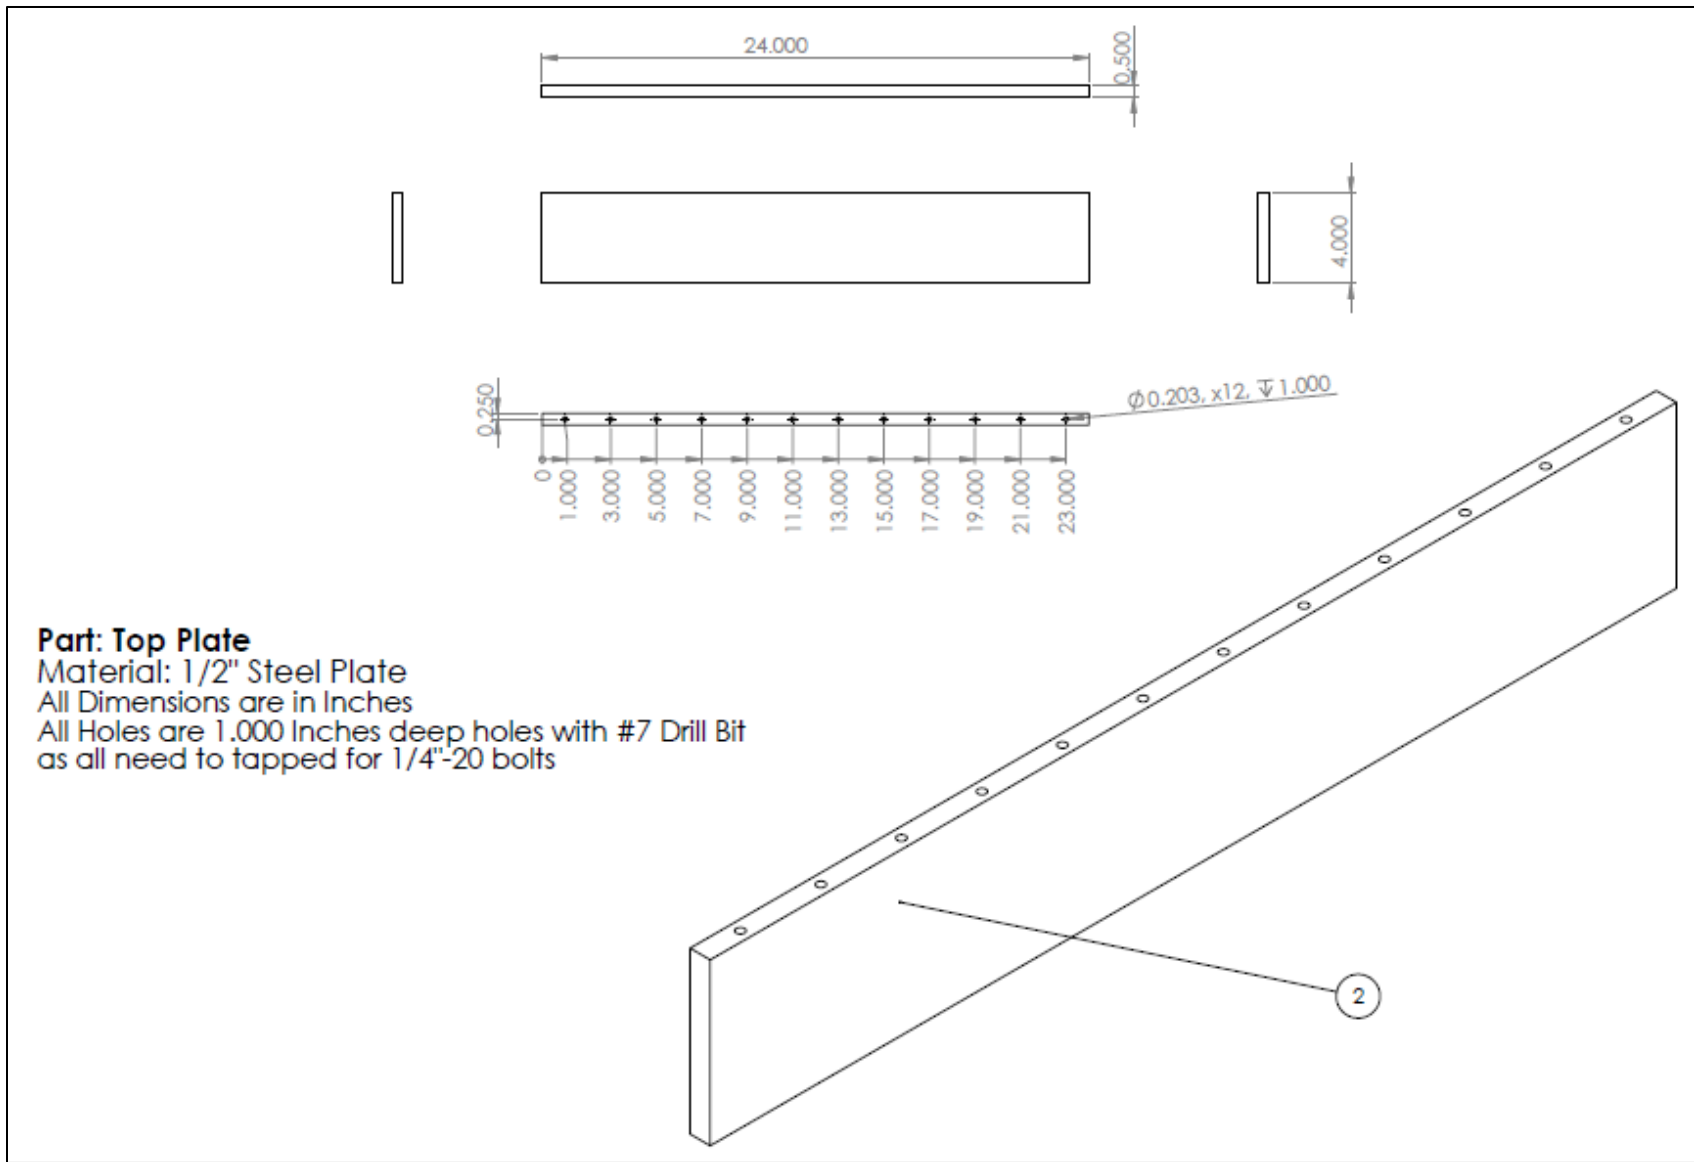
Final Top Plate Design Technical Drawing for Cavitation Tunnel
